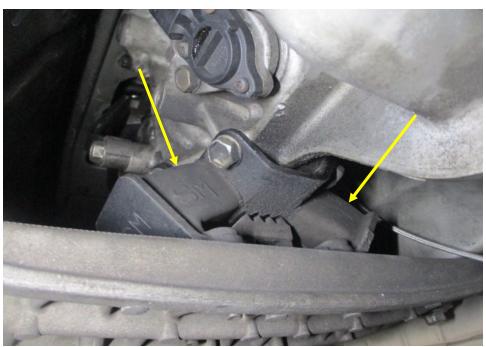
shows the rubber bushing (arrowed), sitting between the transmission assembly and the bracket (front to rear view). The rubber bushing absorbs any vibrations arising from the rotation of the transmission gears, minimising any stress to the bracket.
